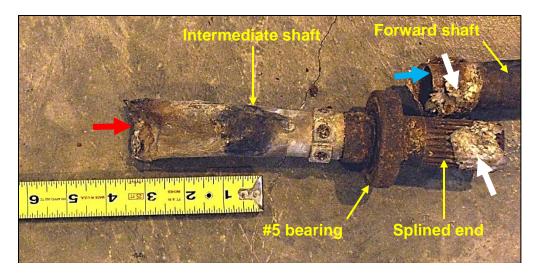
The forward pieces of the tail rotor drive shaft recovered.
